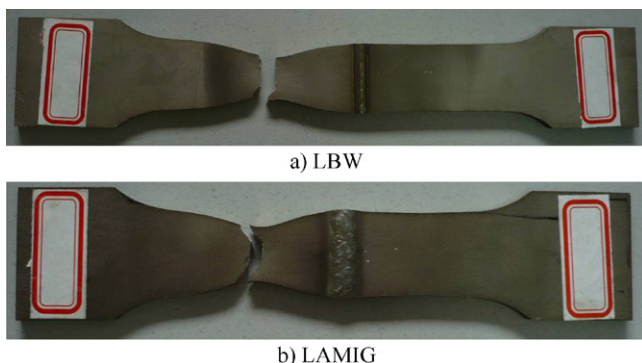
A view of butt joints welded by LBW and LAMIG after tensile tests.
